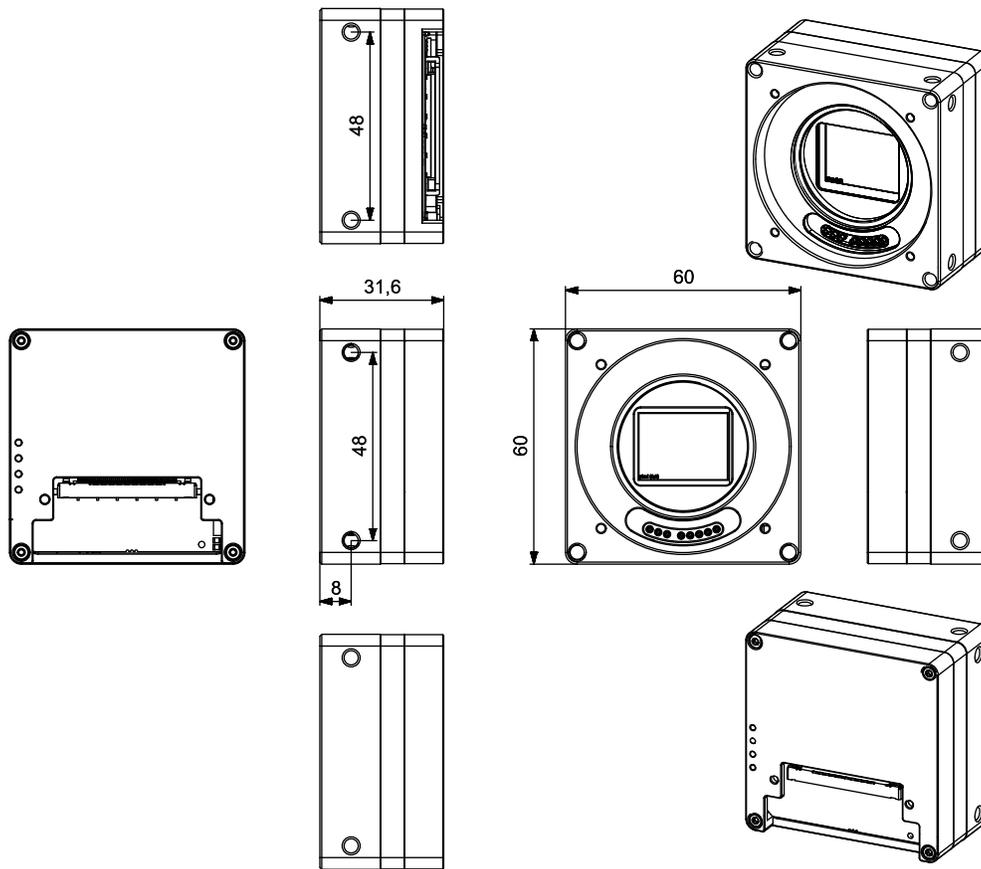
Dimensional drawing of MX120xG-CM-X4G2-FL
